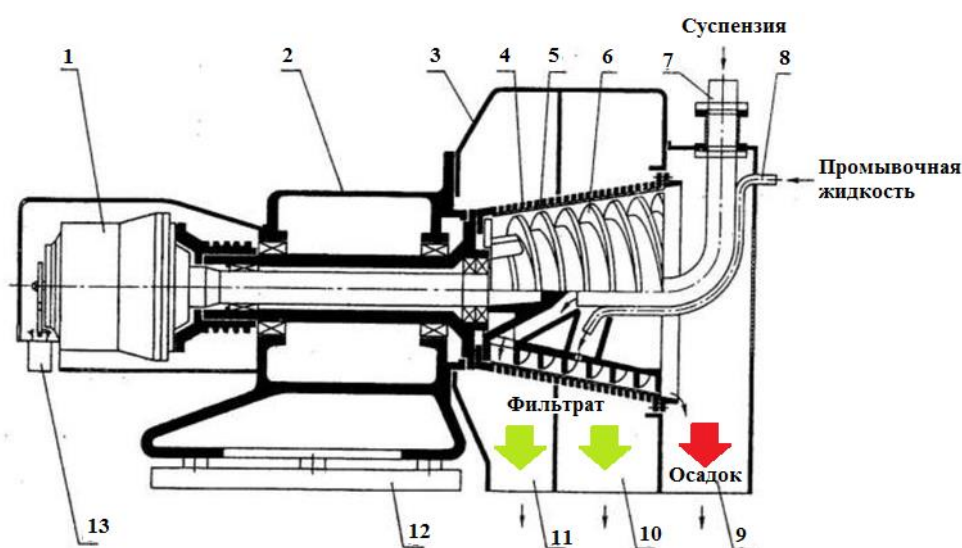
Scheme of a horizontal filtering centrifuge with auger discharge of sediment: 1 - gearbox; 2 - bed; 3 - a casing; 4 - rotor; 5 - filtering surface; 6 - auger conveyor; 7 - supply pipe; 8 - pipe for entering the washing liquid; 9 - sediment discharge chamber; 10 - chamber drainage of washing fluid; 11 - a chamber for removing the filtrate; 12 - vibration isolating device; 13 - safety device
